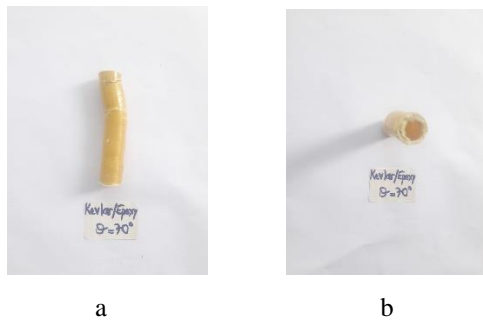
Damage formation of kevlar/epoxy specimen under axial compression load; a) front view, b) top view
